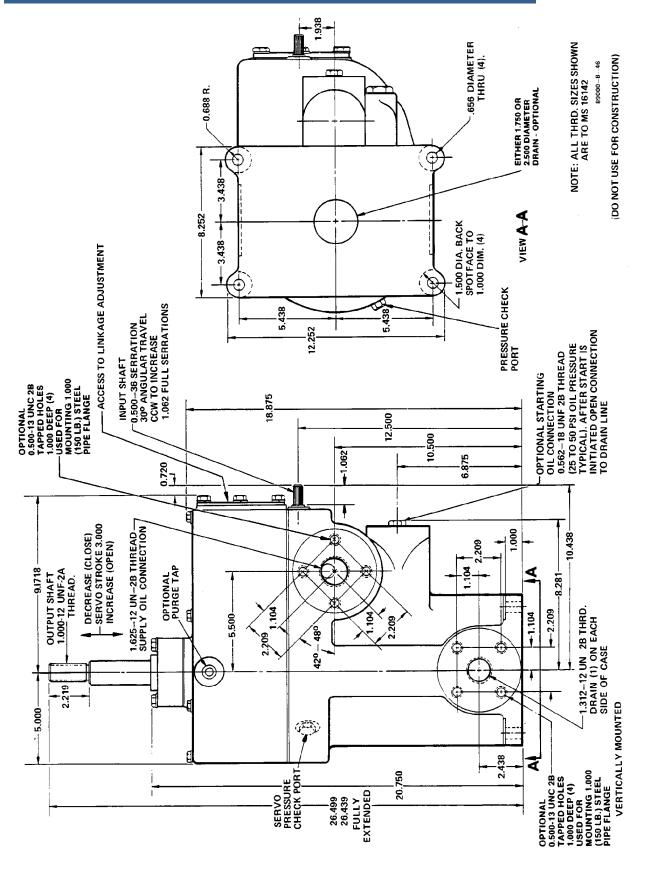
Outline Drawing, 7-1/4" Mechanical-Hydraulic Amplifier
